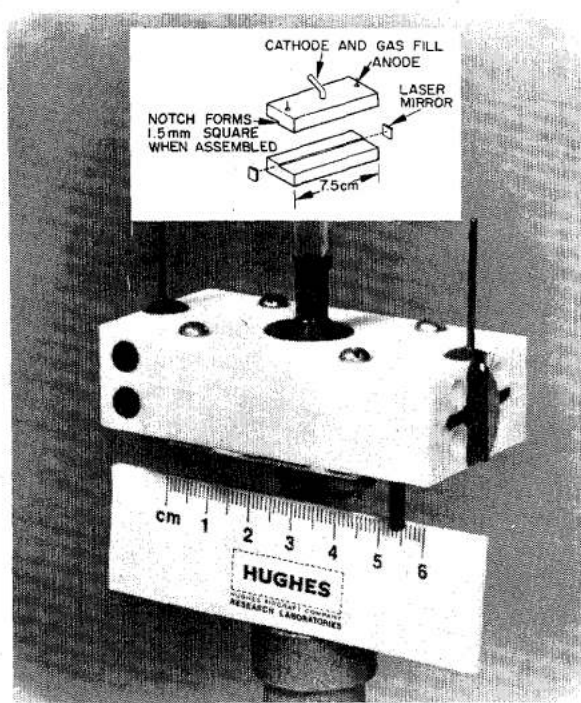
Photograph and exploded view of 3-in 1.4-W channel laser.
